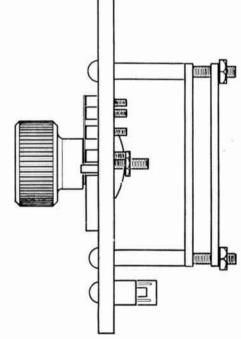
Details of the adjustable condenser which reduces sparking at the contacts
